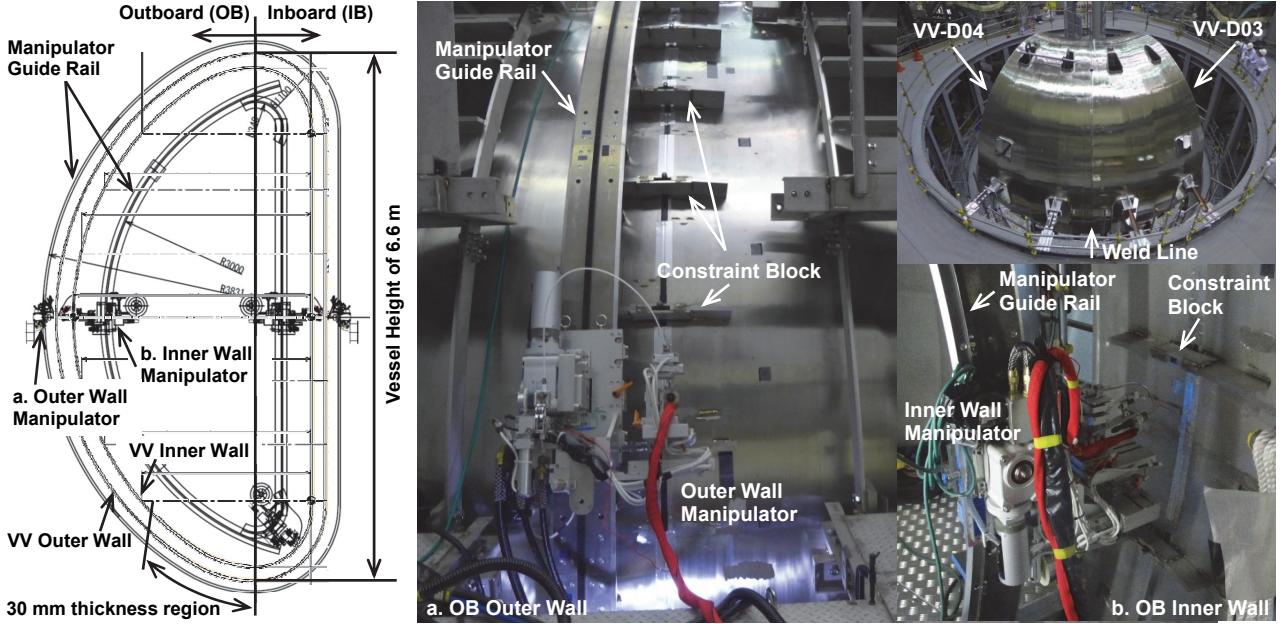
Simultaneous automatic welding manipulation in both walls of the IB and OB are planned to improve the welding efficiency and reduction of the welding distortion (left). Two 40-degree sectors are placed on the cryostat base (right top) and adjusted for direct butt welding by constraint block: the outer wall welding preparation (middle) and inner wall (right bottom).
